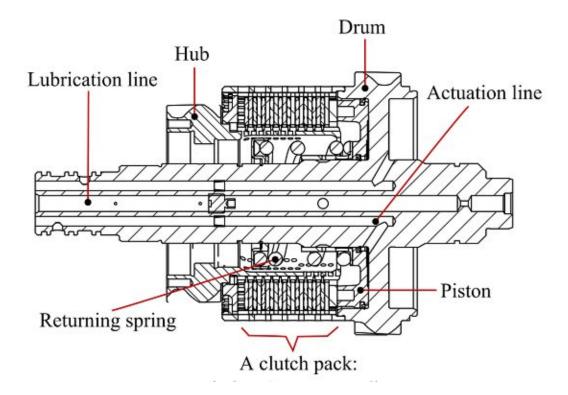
The clutch assembly for an automatic transmission cross-sectional view.<sup>160</sup>
